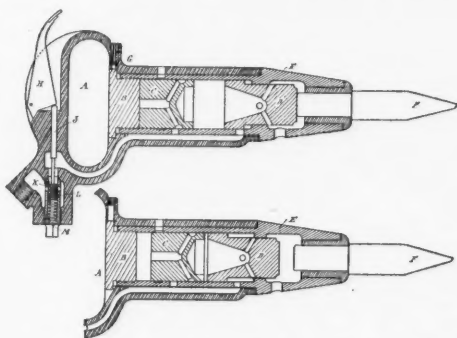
Counter-Balanced Pneumatic Hammer.
